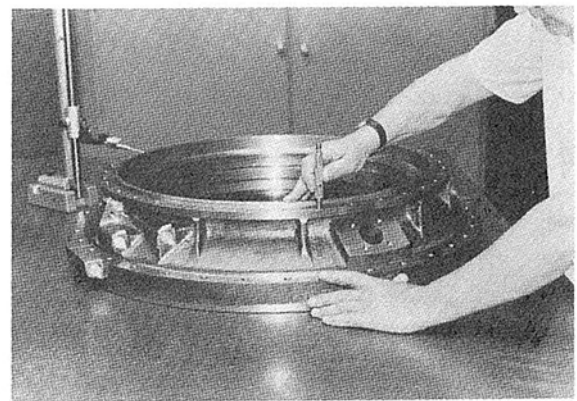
Centrifugal casting showing shaped outer cast profile—material HR Crown Max
